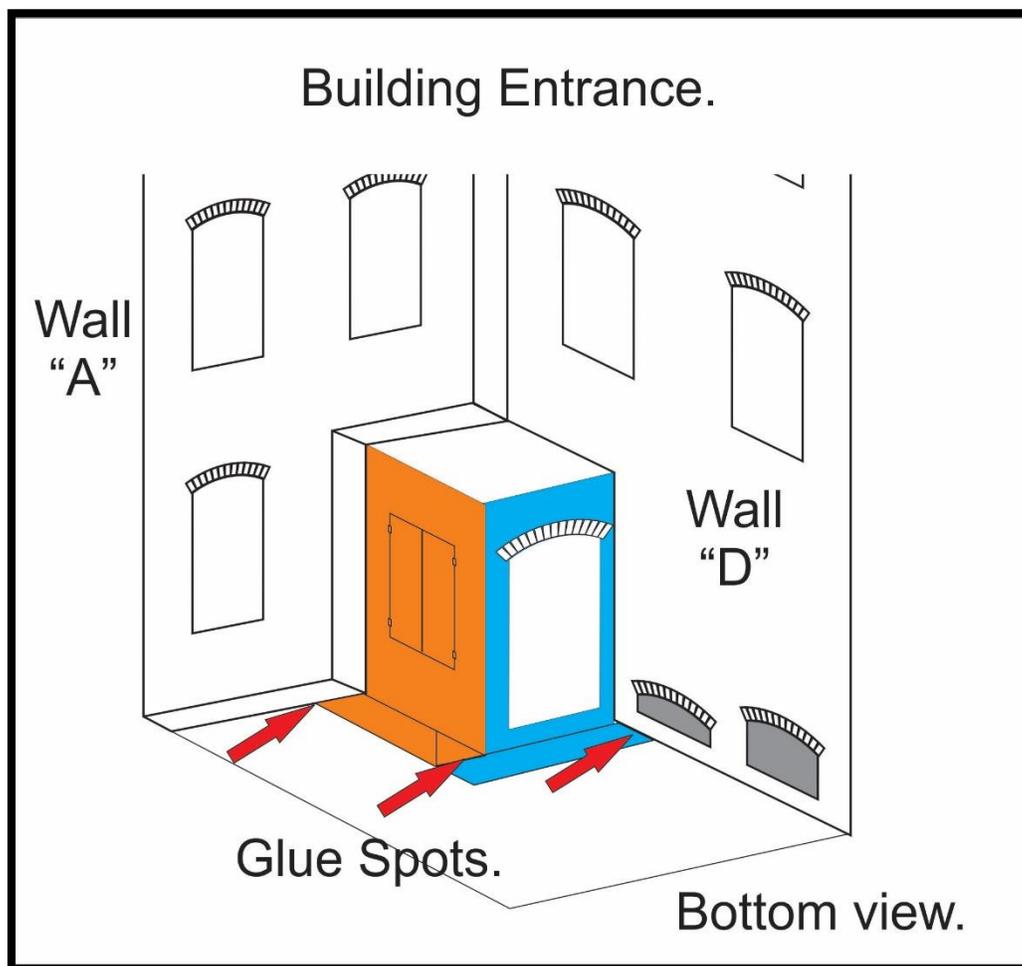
PLACE AND GLUE THE RECESSED ENTRANCE WALLS
